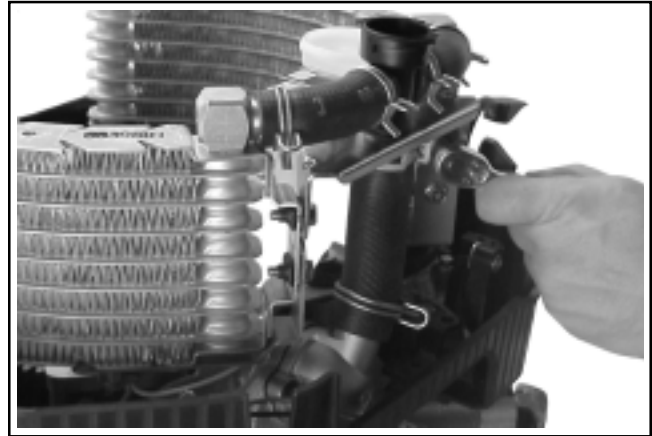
Tightening Upper Mounting Screws with Reservoir Installed.
